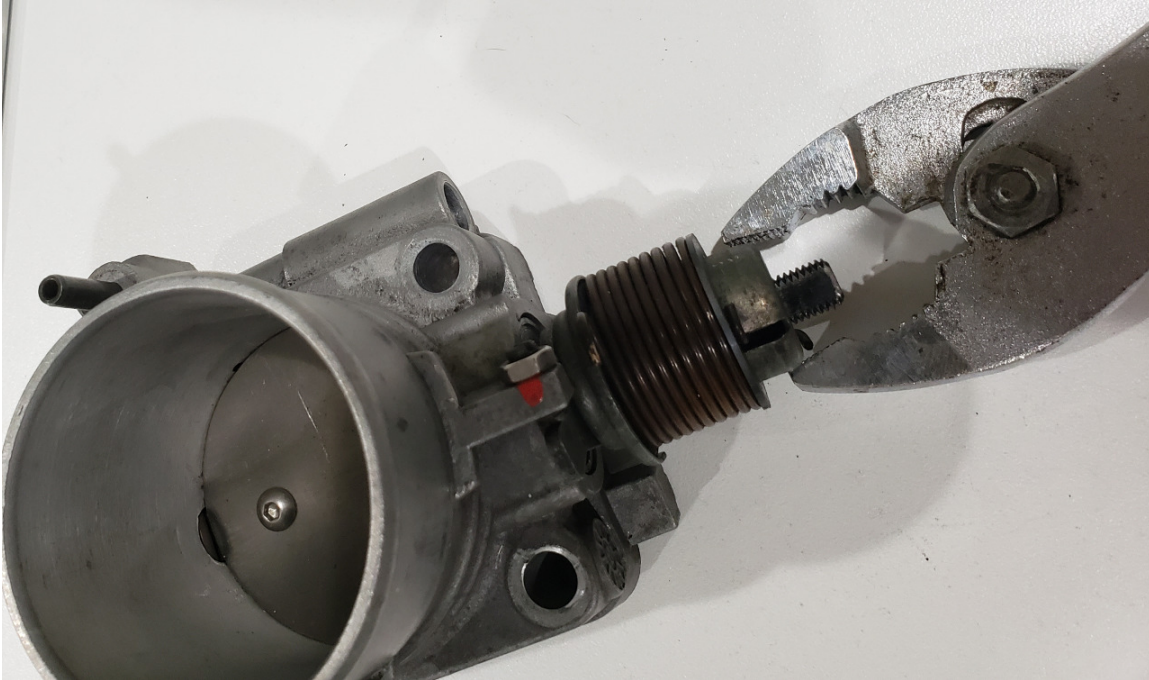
using pliers to grab and twist spring retainer for disassembly
